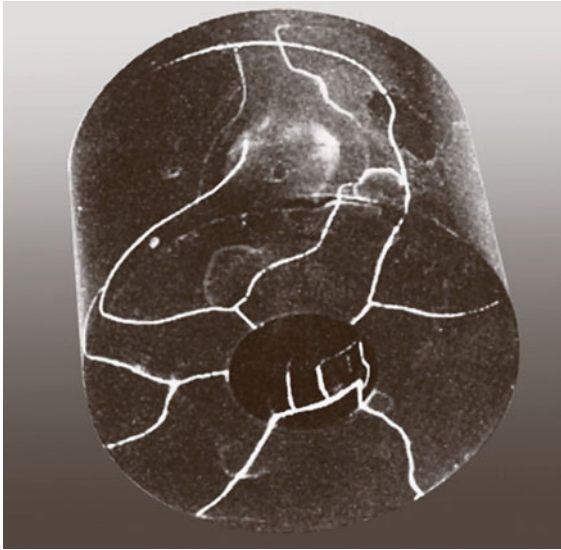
Result of penetrant inspection for cracks in a roller
